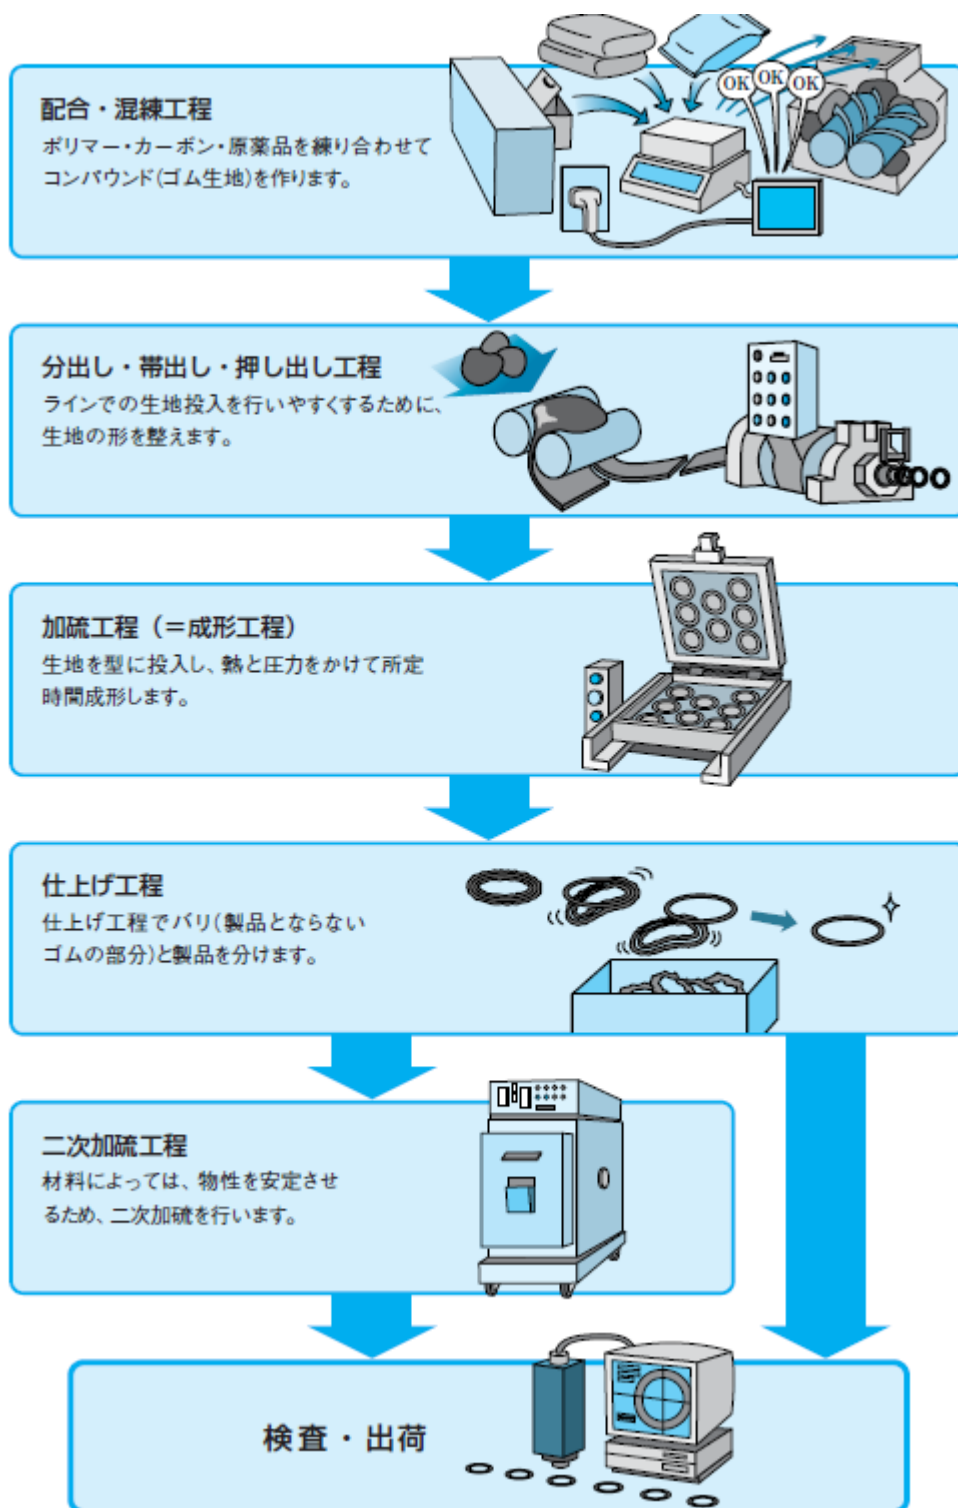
Manufacturing process of rubber O-ring¹³⁾
